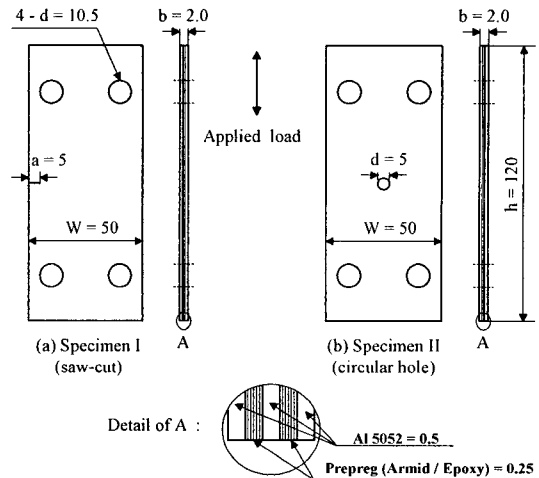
Geometries of FRCM containing a (a) saw-cut and (b) circular hole (unit : mm)
